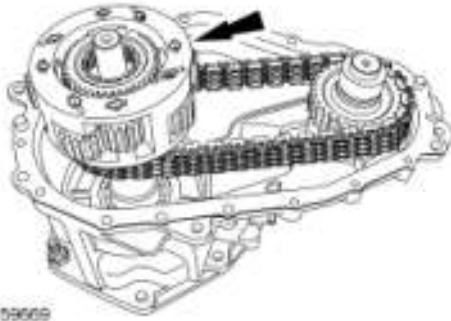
Identifying Upper Planetary Gear, Thrust Washer, Planetary, Upper Drive Sprocket, Drive Chain, Lower Drive Sprocket & Sprocket Spacer
